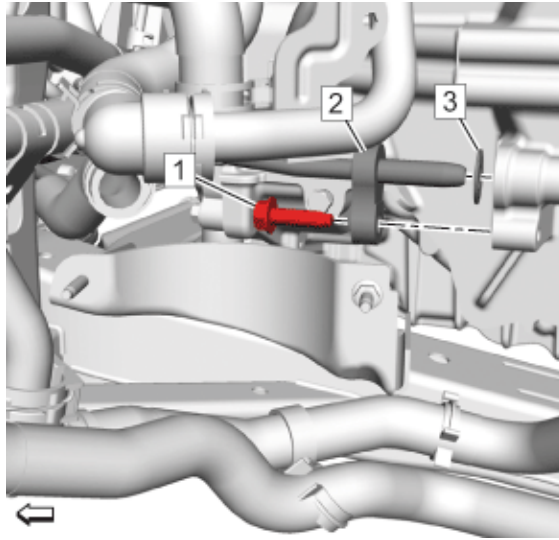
Transmission Fluid Cooler Outlet Pipe, Bolt And Sealing Washer
